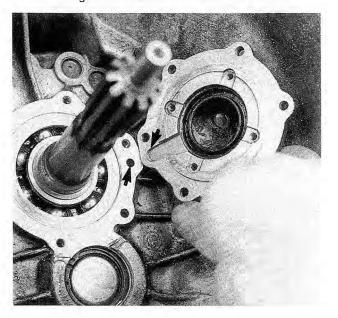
Clutch guide seal oil groove and transmission case oil bore (arrows).
